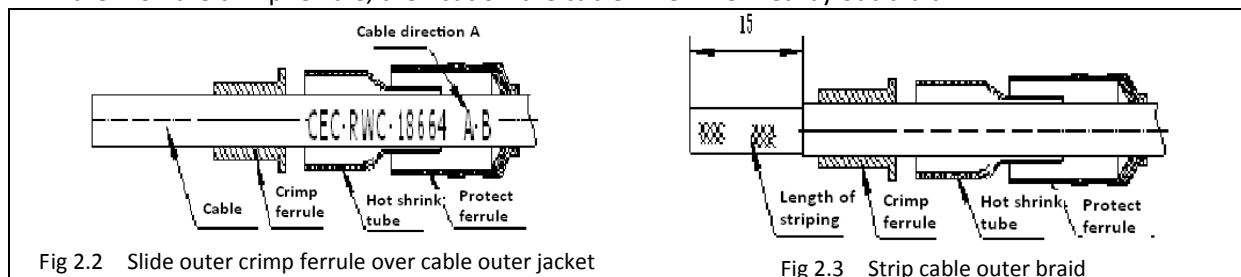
Slide outer crimp ferrule over cable outer jacket
